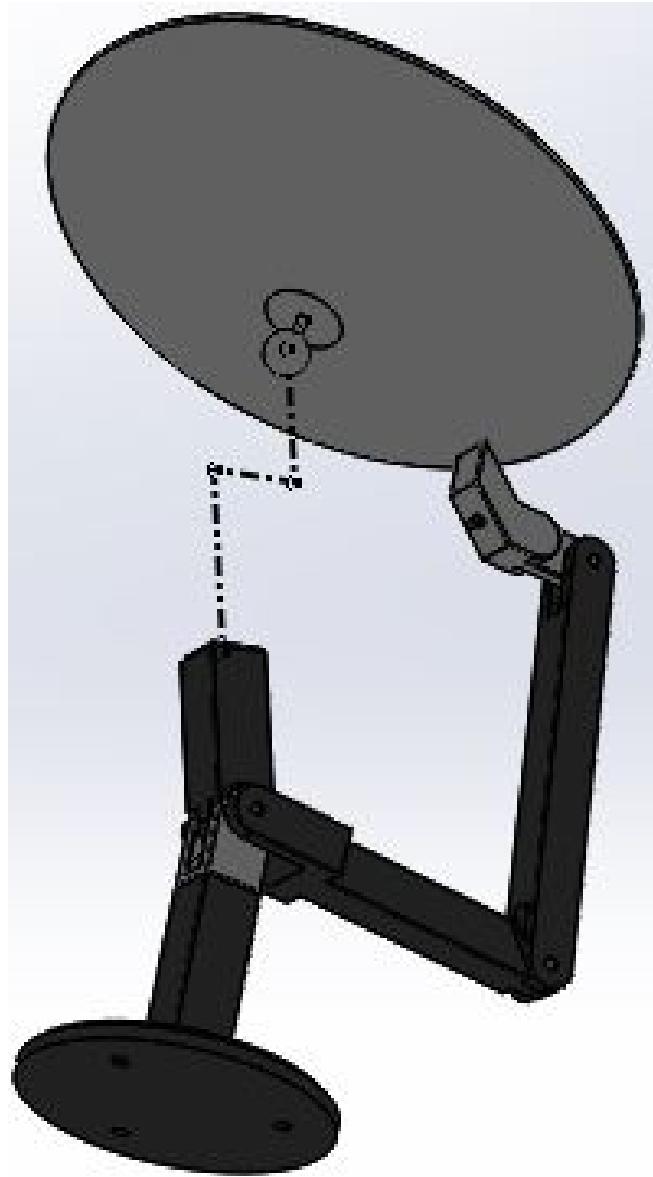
Rodriguez, Juan: Assembly Step 5
